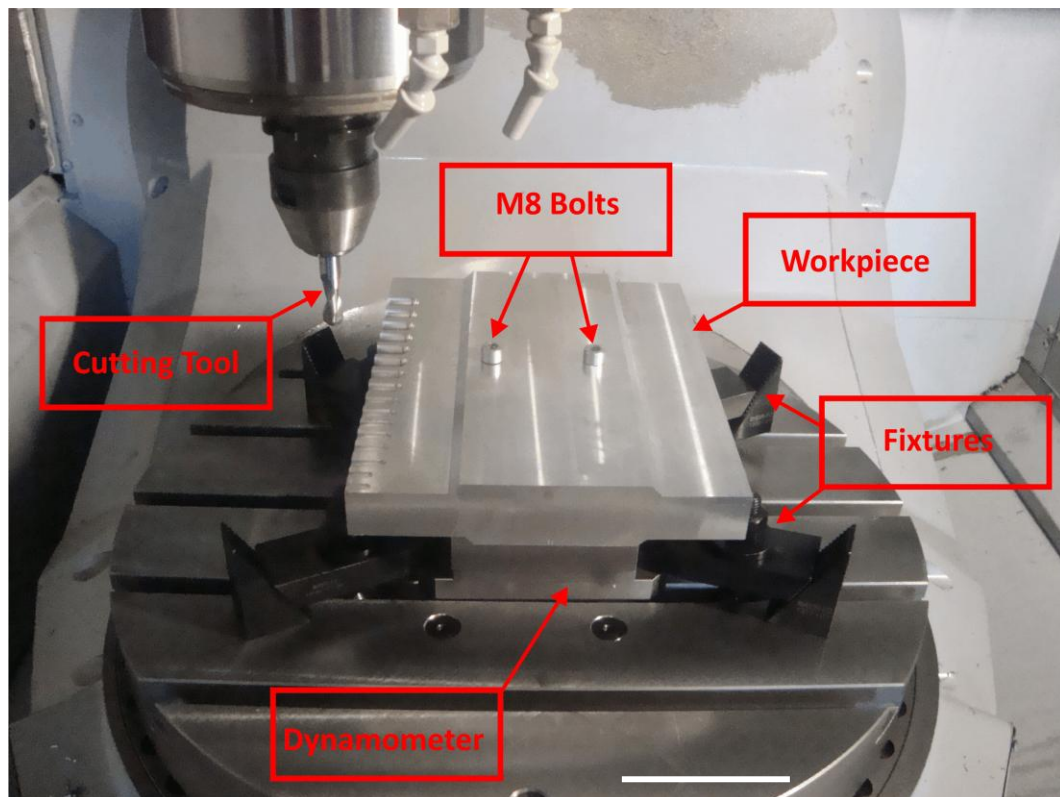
Workpiece and 3-component dynamometer fixed to VMC machine table for cutting tests
